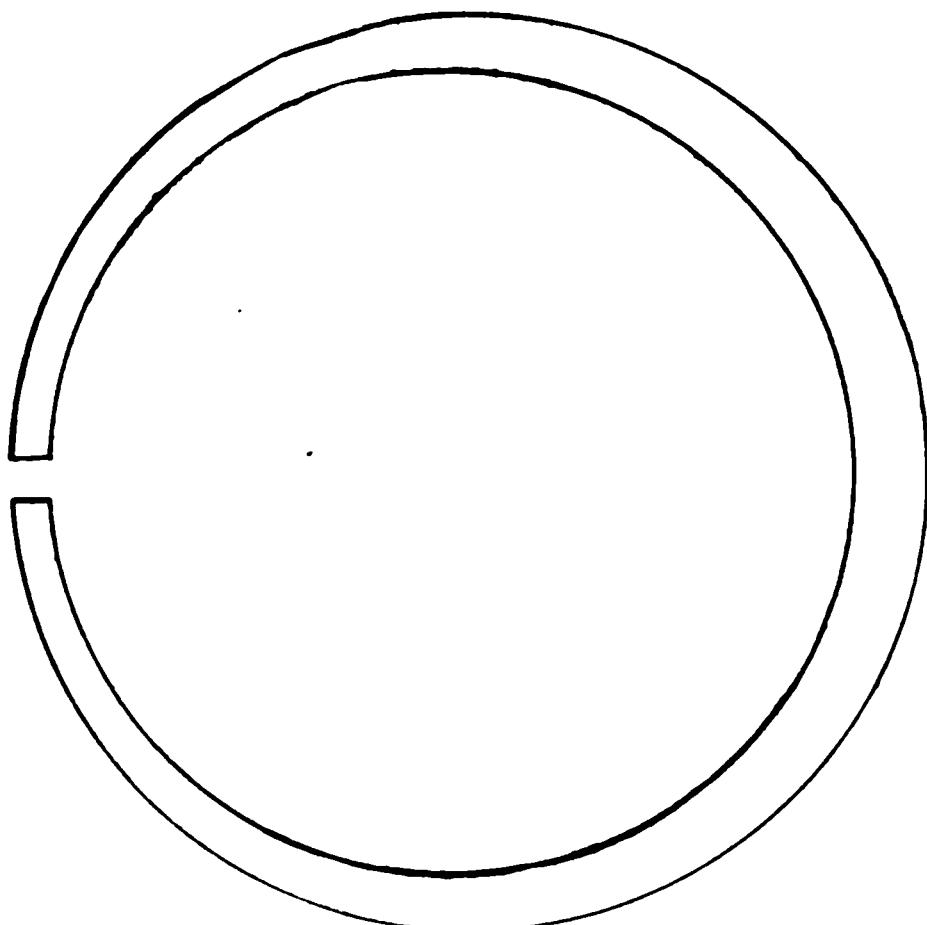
Piston Packing Ring for a Gas Engine Cylinder. The inner and outer circumferences are eccentrically arranged, so as to permit of considerable expansion under heat.
